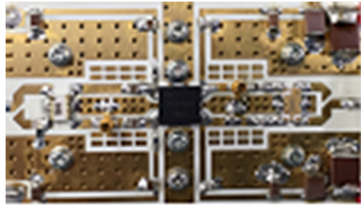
Photograph of the developed plastic packaged device and the test fixture.
